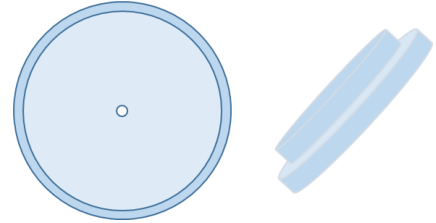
Beam alignment tool machined using an acrylic disk to match the cavity arm end.
